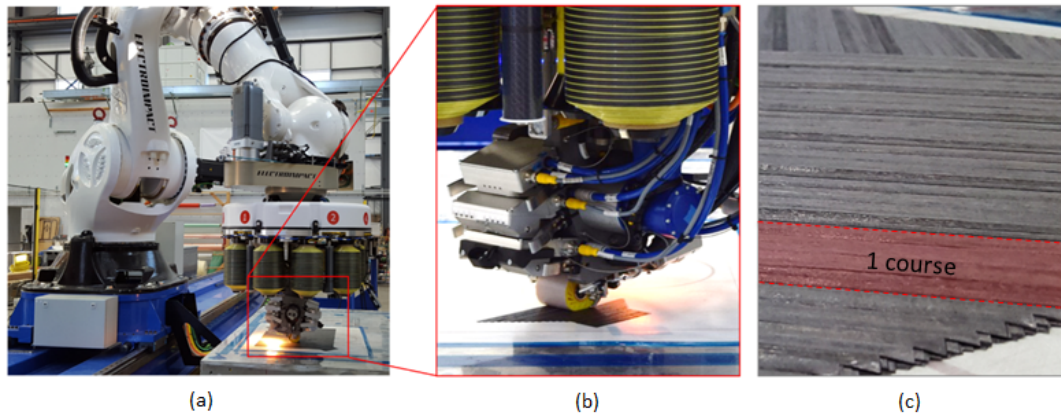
(a) An Electroimpact AFP Machine (b) Fiber Placement head of an Electroimpact machine showing roller head and spools of RAFP compliant pre-preg slit tapes (c) Process of lay-up
